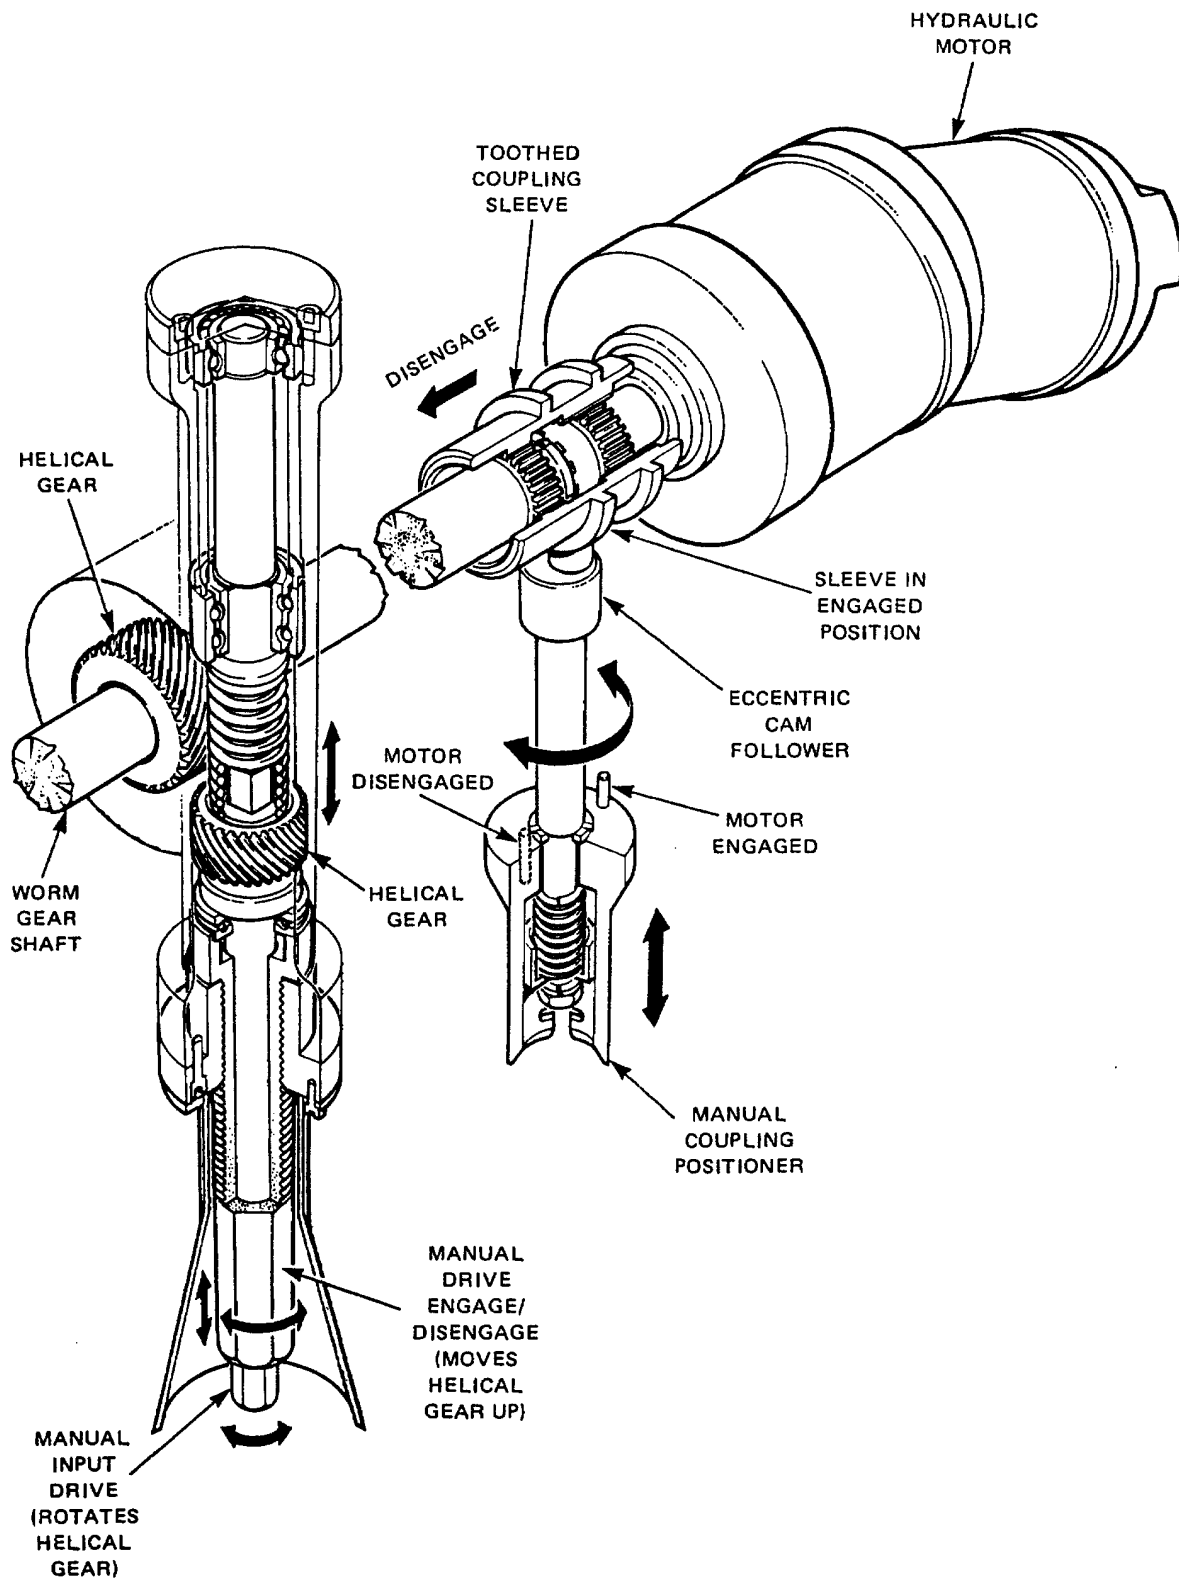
'B' Ram/Latch Ram Manual Drive Assembly
